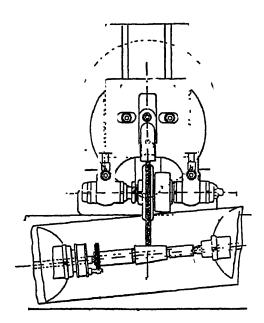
SWIVEL TABLE SET OVER FOR GRIND-ING AN EXTERNAL TAPER
